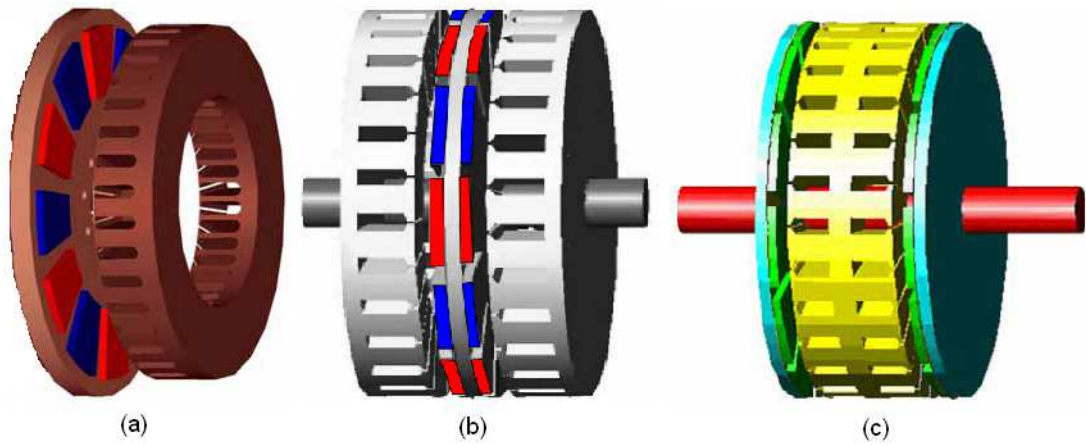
Slotted surface-mounted AFPM machines. (a) one rotor and one stator [132], (b) one rotor and two stators [133], (c) two rotors and one stator [134]
